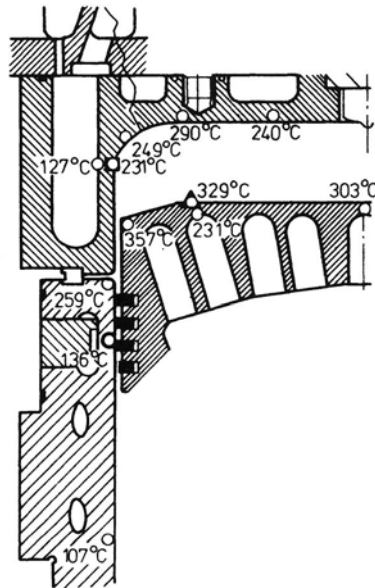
Drilled liner cooling passages on a MAN two-stroke engine
